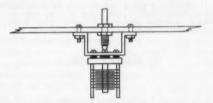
Drawing of the bracket-bearing assembly that permits knob control of short-shaft variable capacitors.
